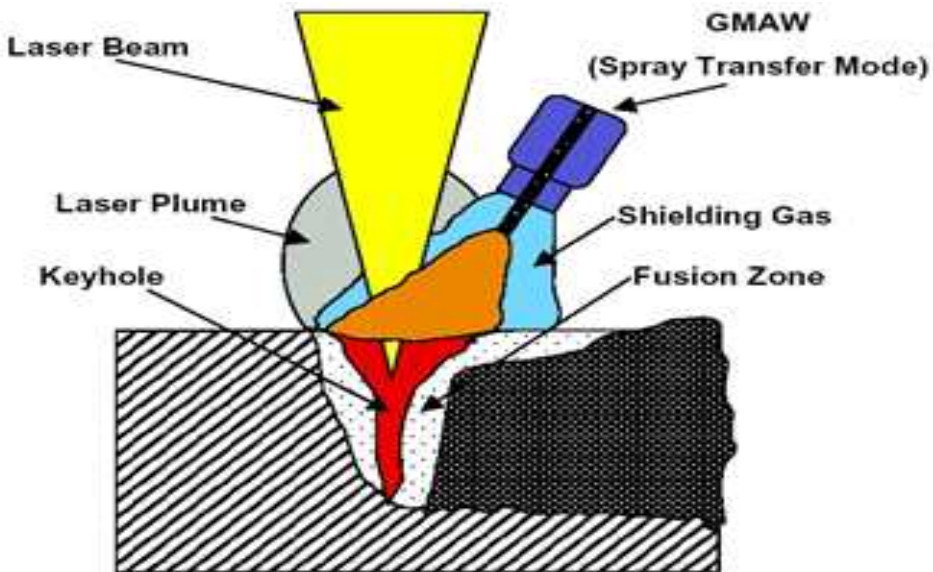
Schematic diagram of laser-arc hybrid welding
